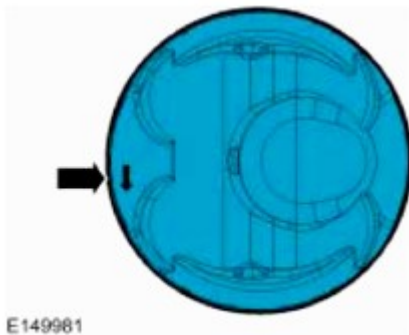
Identifying Piston Arrow Pointing To Front Of Engine
